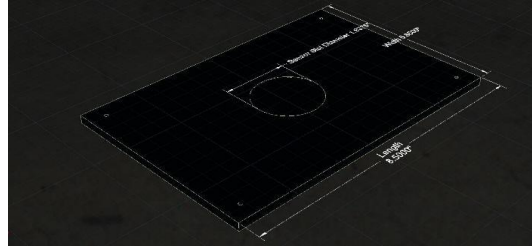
Hollow channel in the upper part (3D wire-view)
